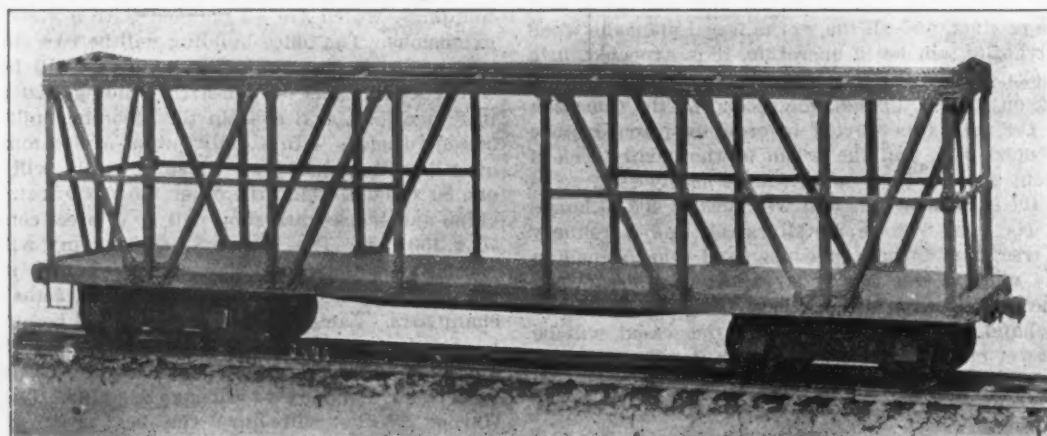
Complete Pressed Steel Frame for 80,000-pound Box Car.
